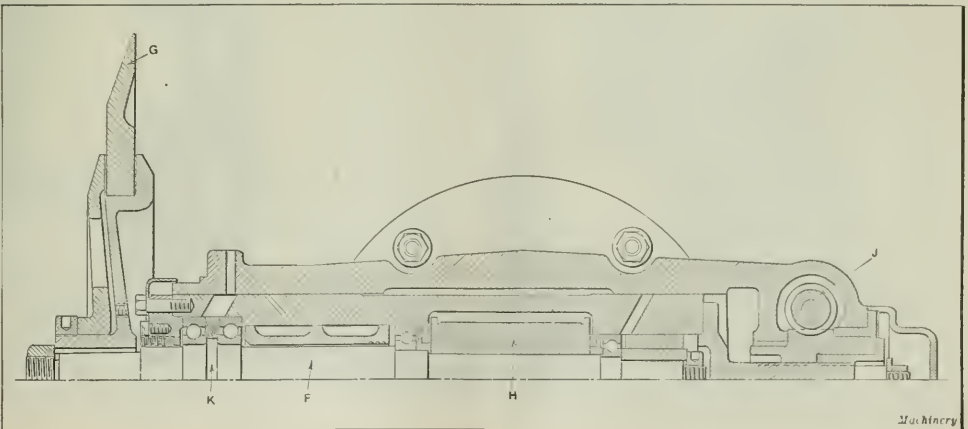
Longitudinal Sectional View of Grinding Wheel Spindle
